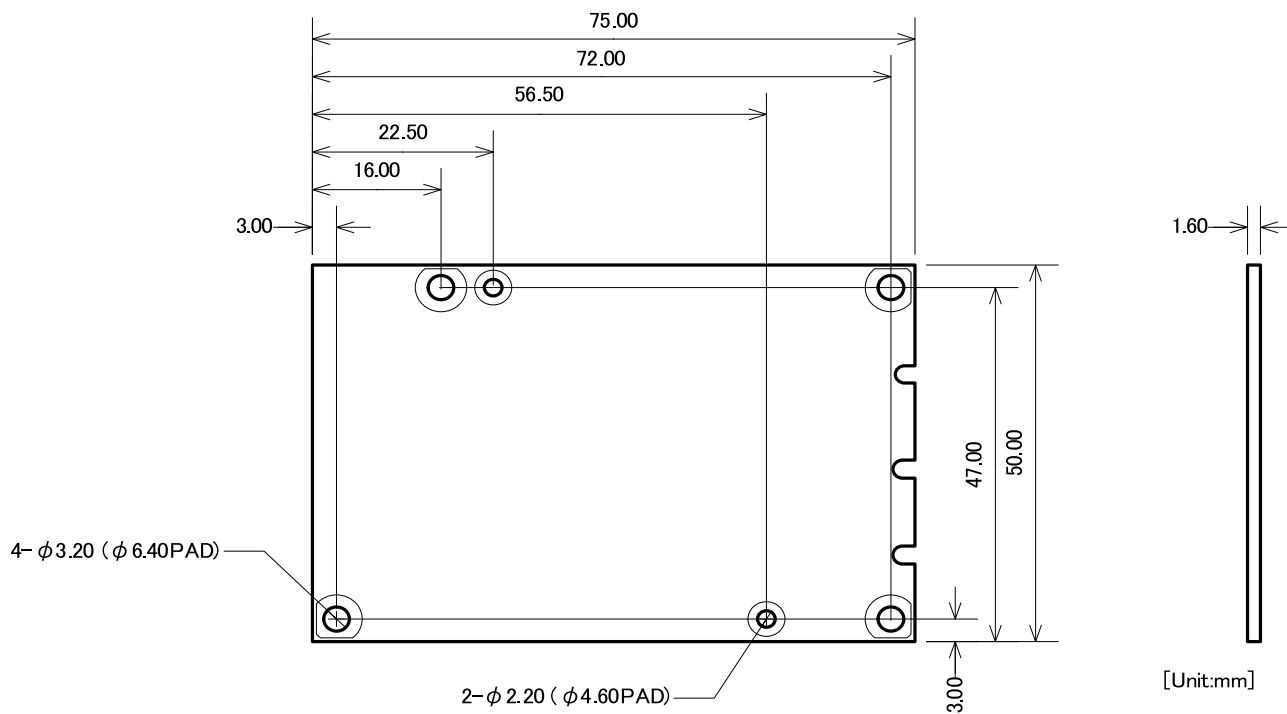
Armadillo-440 Board Outline and Fixing Hole Measurements
